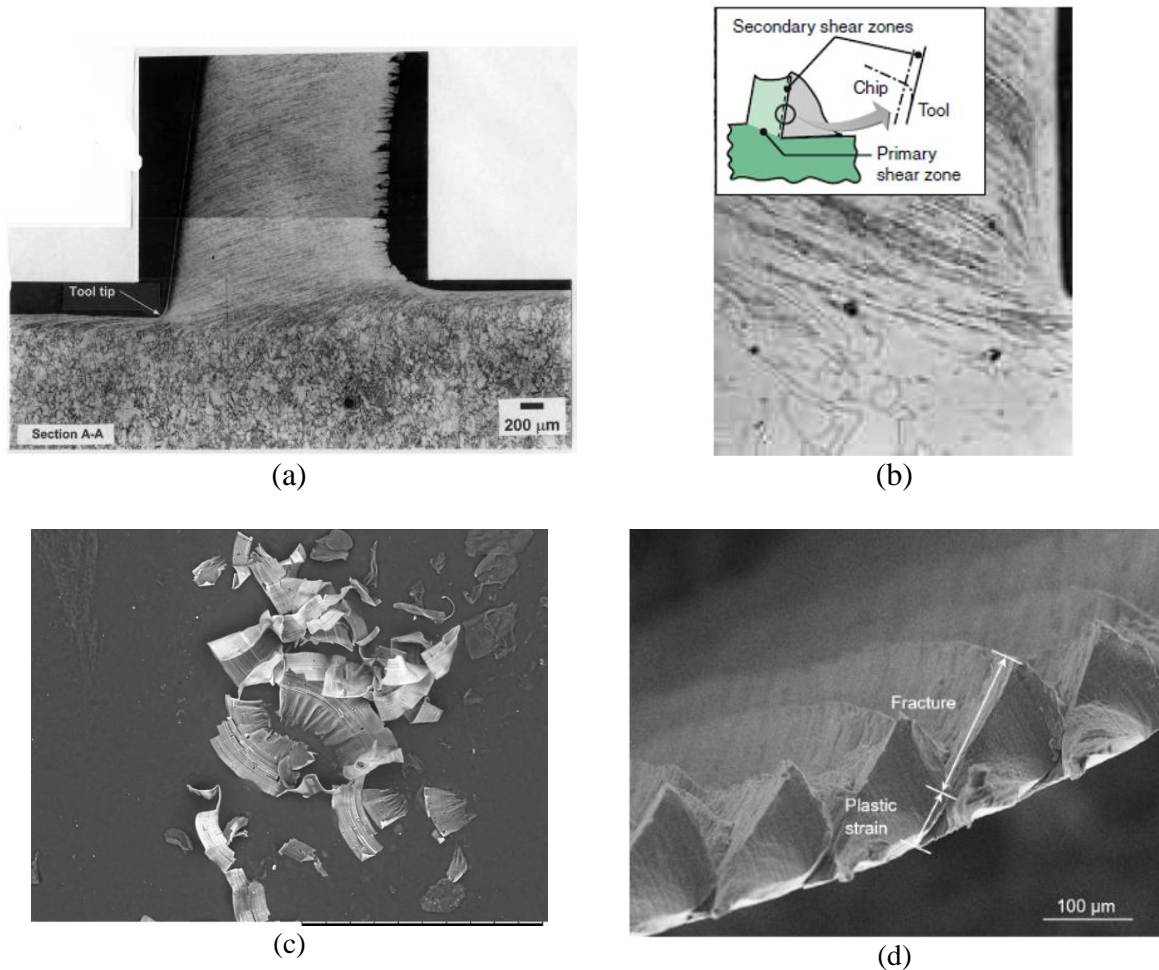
(a) Continuous chip with narrow, straight, and primary shear zone produced during orthogonal cutting of pure copper [15]; (b) continuous chip with secondary shear zone at the chip-tool interface [11]; (c) discontinuous chip produced during machining of Al6061 [16]; and (d) serrated (segmented) chip of Ti alloy formed under cryogenic cutting [17].
